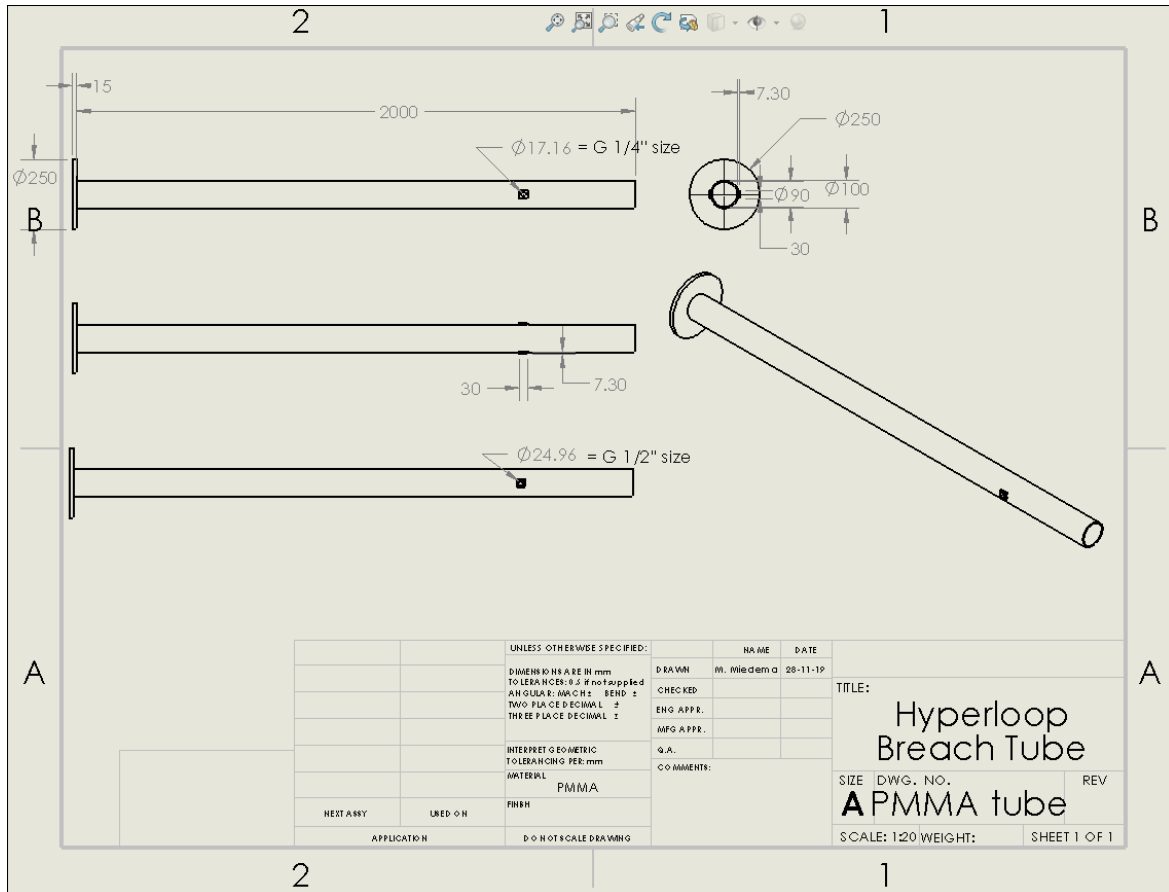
Detailed drawing of the Plexiglas tube used in Hyperloop Breach testing
